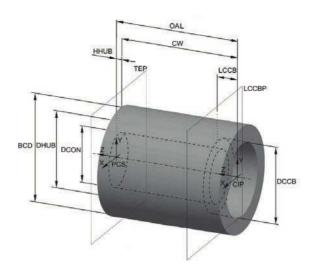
Connection type 2 — Bore with countersunk — Revolved body
